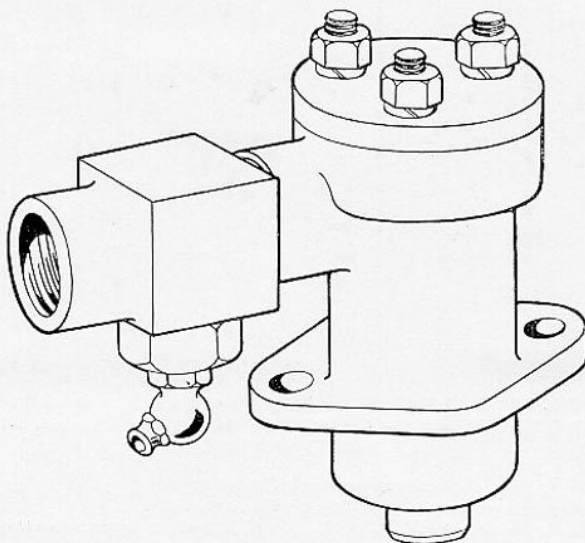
THROTTLE CONTROL MOTOR PISTON AND CYLINDER ASSEMBLY, SHOWING LUBRICATOR
